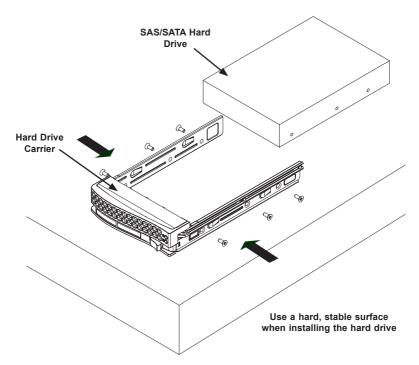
Installing a Hard Drive into a Hard Drive Carrier
